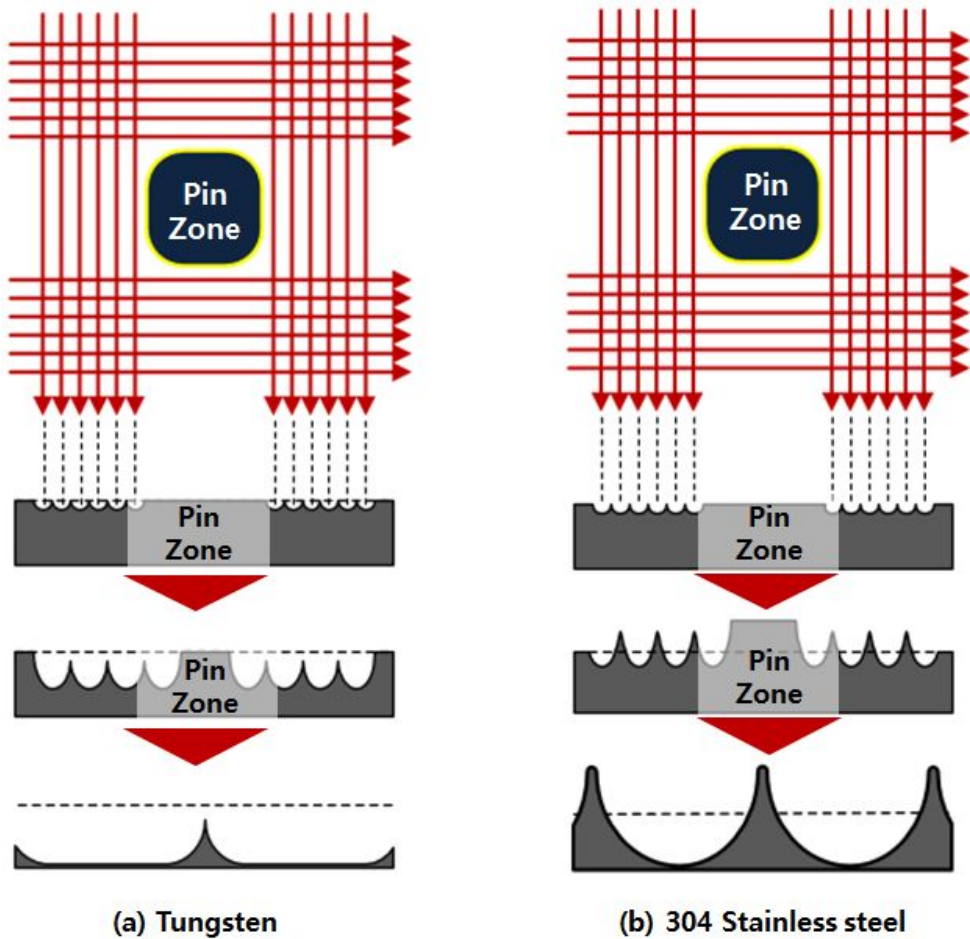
Principle of laser beam machining for surface structuring on (a) tungsten and (b) 304 stainless steel
